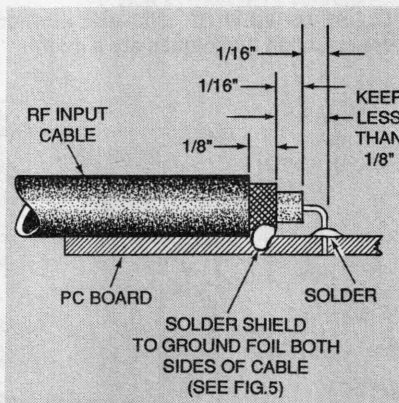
INSTALLATION of RF input cable is critical. Keep recommended dimensions equal to or less than given in diagram, otherwise excessive losses will occur.
